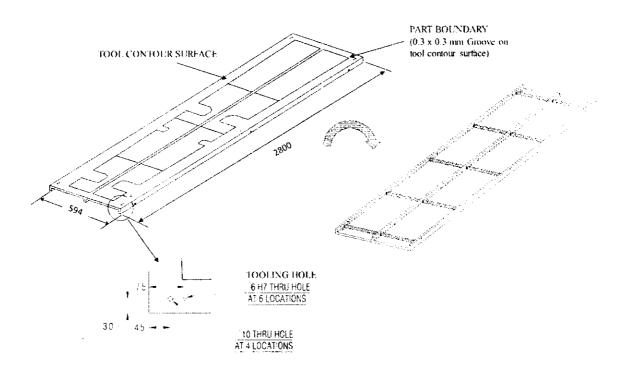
Isometric view of access cover out-board (LH & RH) tool
